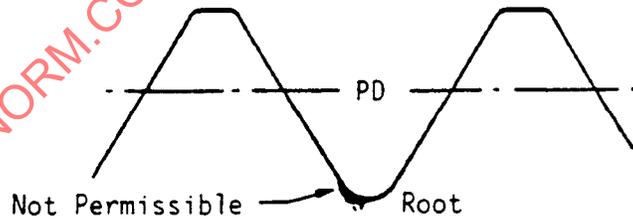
ROOT DEFECTS, ROLLED THREAD
